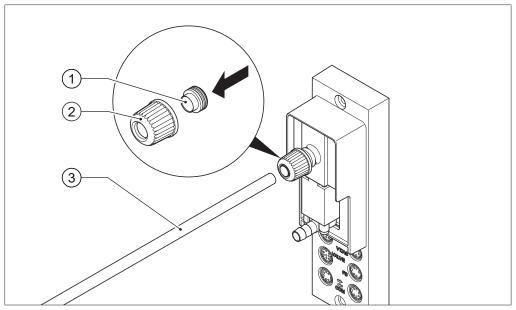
Fitting GL14 union nut with tube seal (example shows VacuBox)
